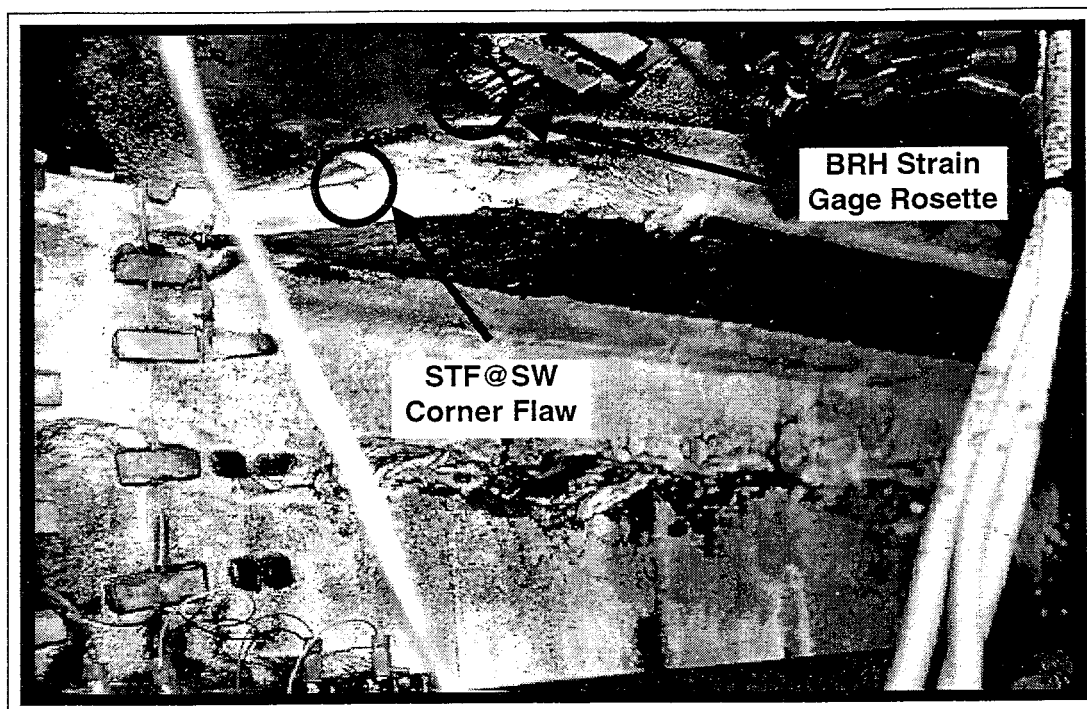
B-end Right Corner Flaw and Tank Head Rosette
